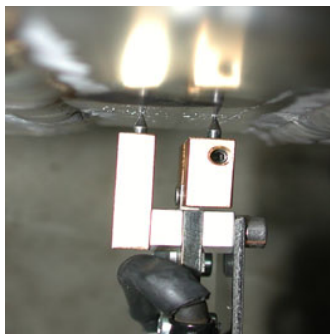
Extensometer applied to back side of plate with point contact on opposite sides of weld bead, fixed 10 mm apart.
